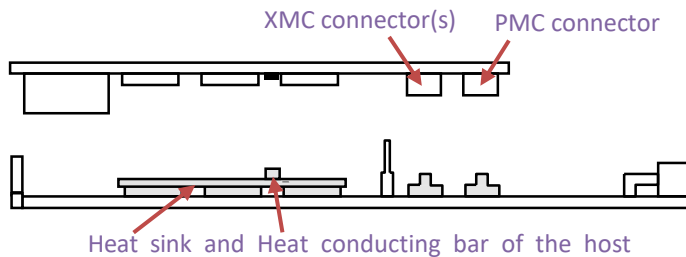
Major elements for mounting a RC-class XMC board on a host board
